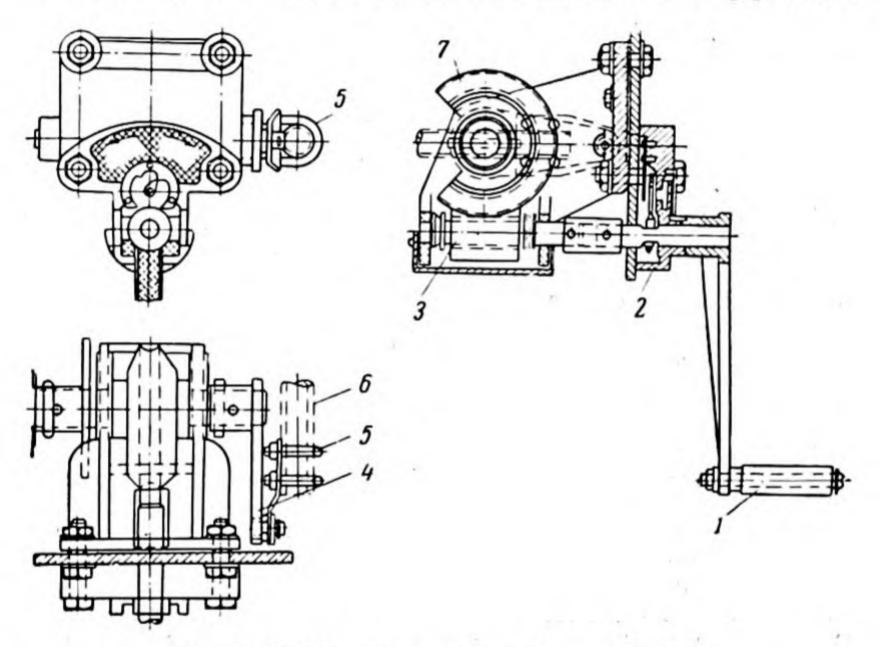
Isolator worm-gear operating mechanism: 1-crank arm; 2-body; 3-worm; 4-lever; 5-clip for attaching tie rod; 6-tie rod to isolator; 7-worm gear
